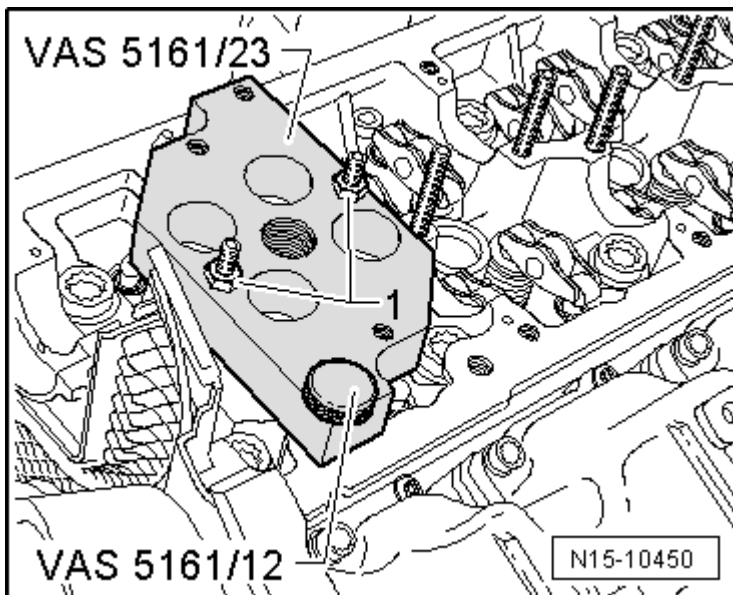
Identifying Guide Plate VAS 5161/23 Secured Using Knurled Screw VAS 5161/12
